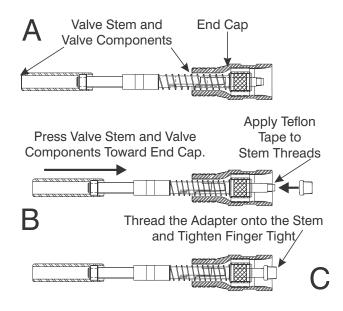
Install the Thread Adapter on the Valve Stem.
